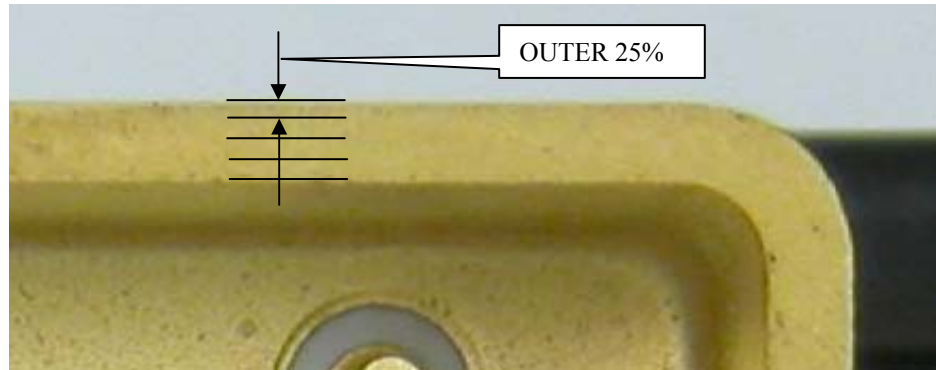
Critical seal area of a seam-weld package
